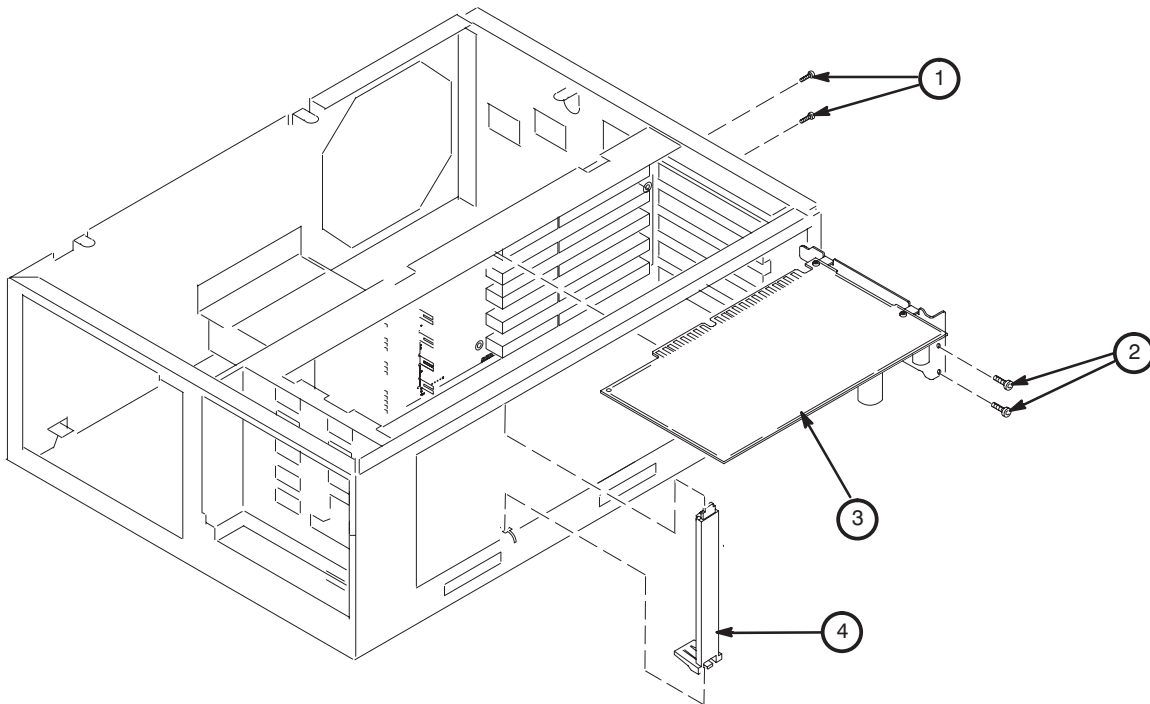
A23 Option 13 Assembly Removal (TDS 400)
